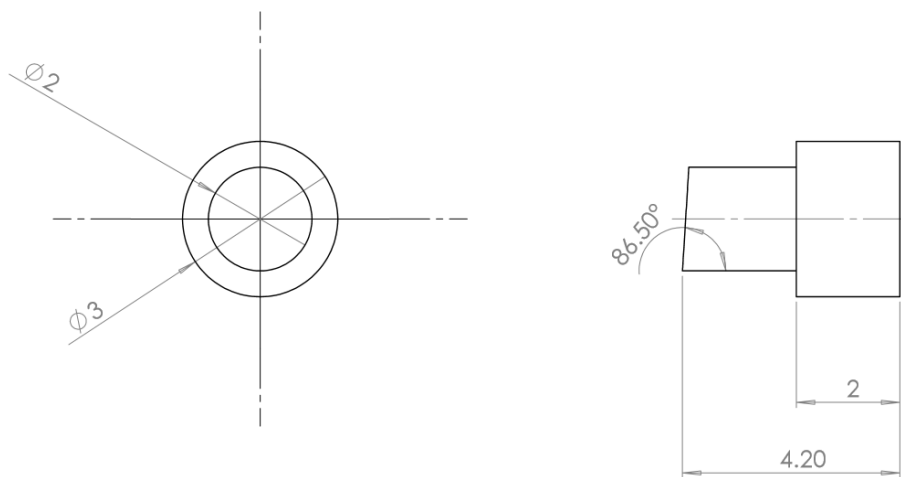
The design for the outer-wedge window. All dimensions are in millimeters unless otherwise specified.
